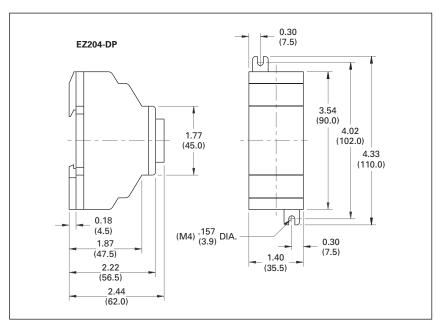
EZ204-DP Series Dimensions in Inches (mm), Drawing Number MD05013011E
